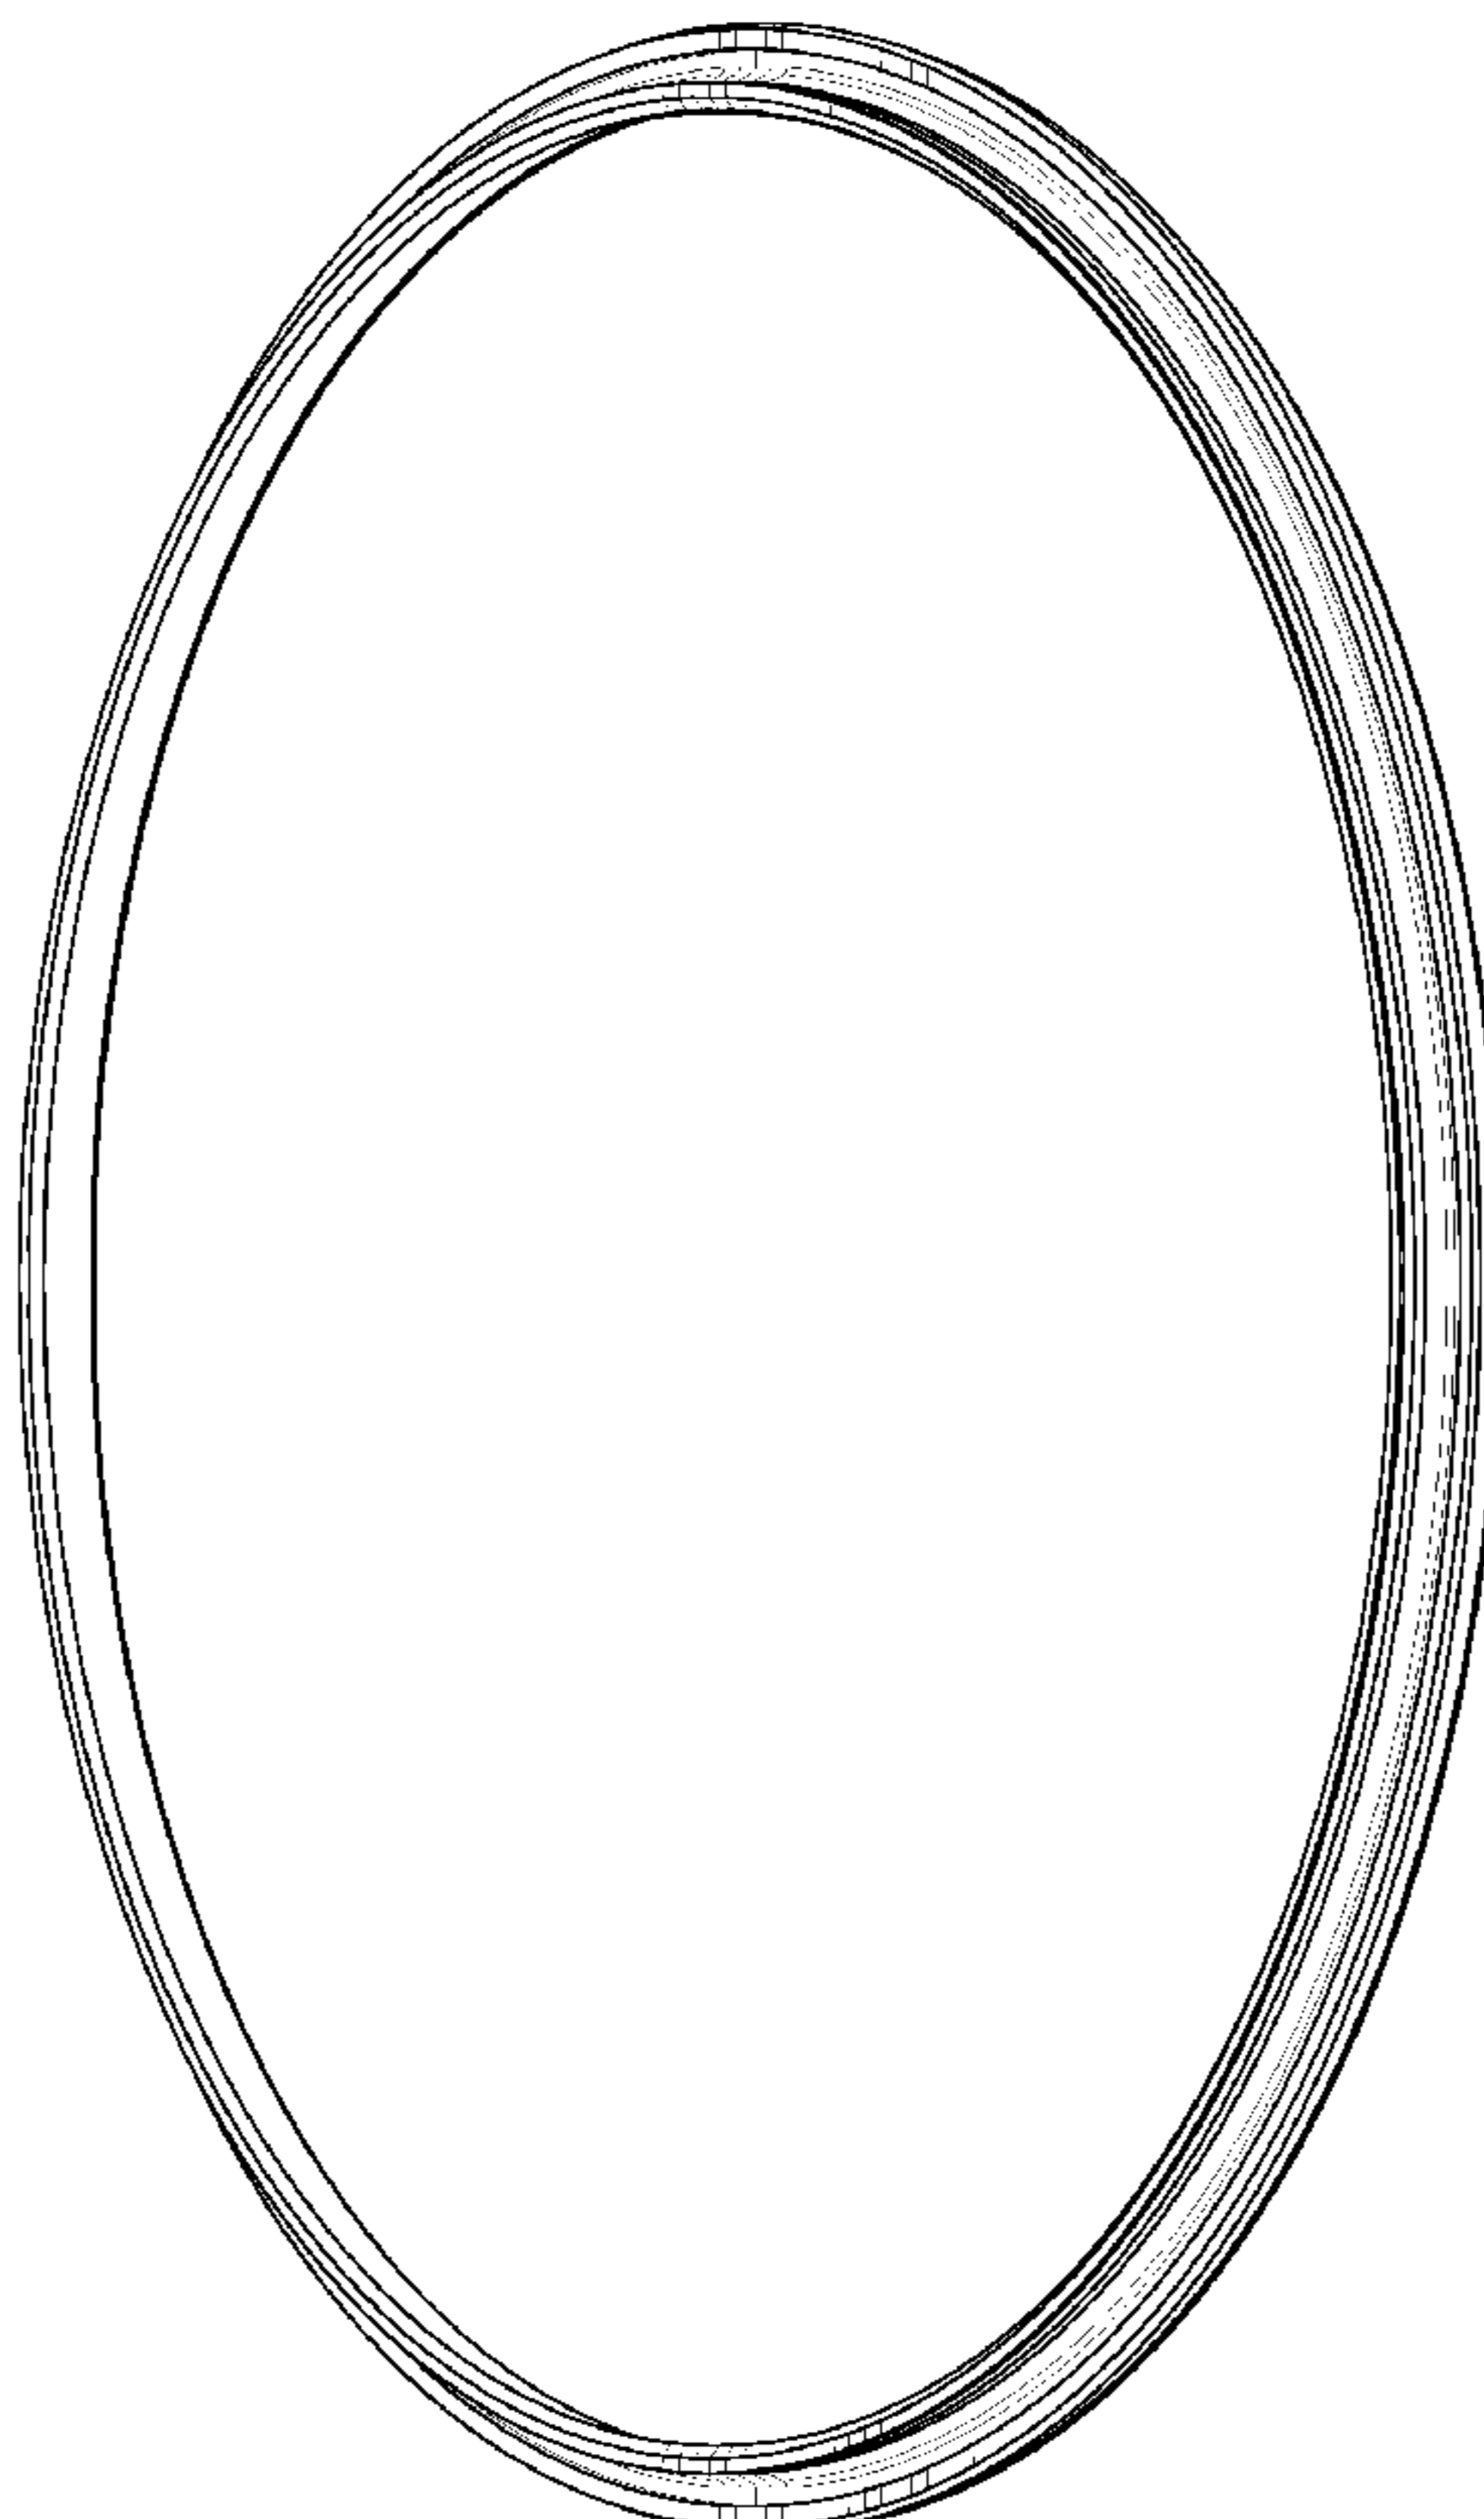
is a right-side view of the seal ring, the left-side view being a mirror image of the right-side view, and the top and bottom view being identical thereto.
